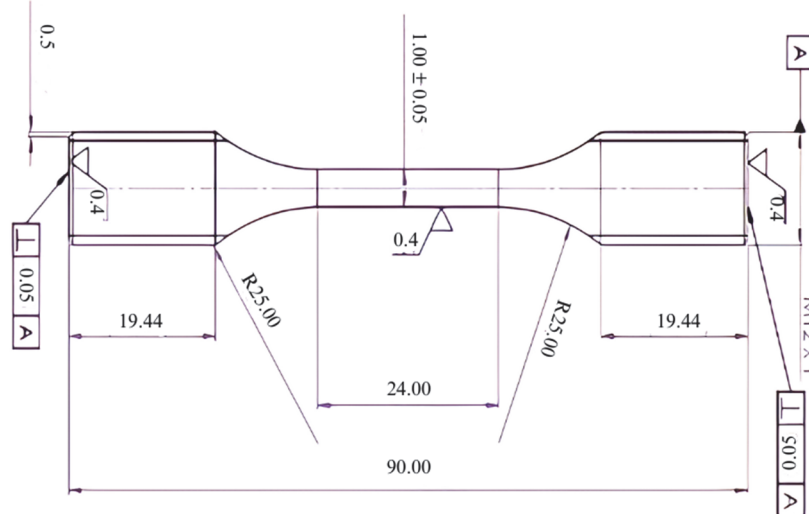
Shape and dimensions of steel specimens for fatigue tests.
